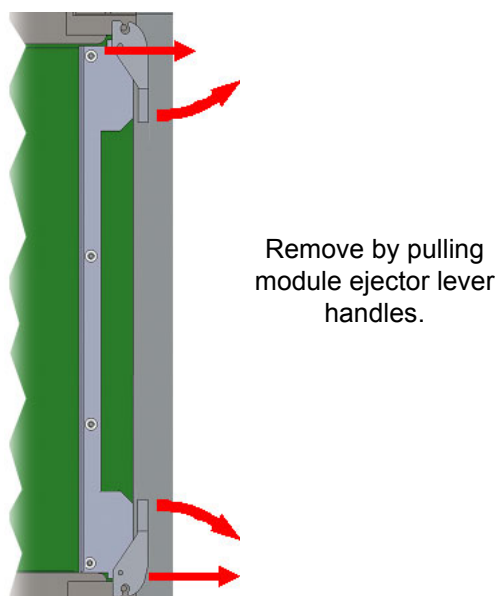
Removing Front Modules, showing use of module eject levers
